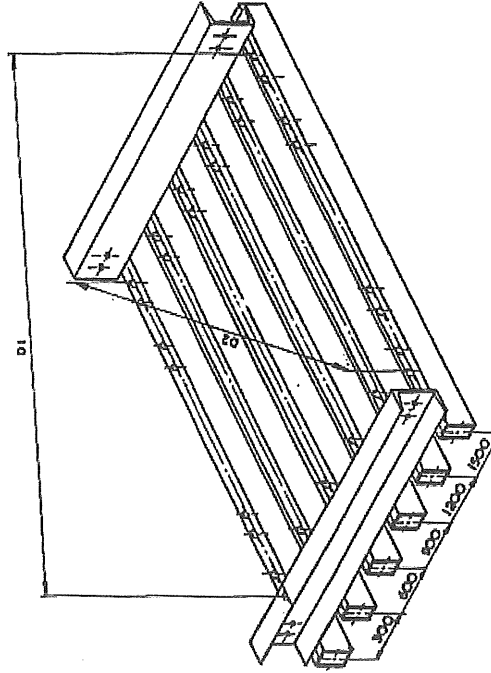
DIMENSIONAL CHECK ON FRAME OF EMITTING SYSTEM -BOTTOM (600MM WIDE CE PLATE)
